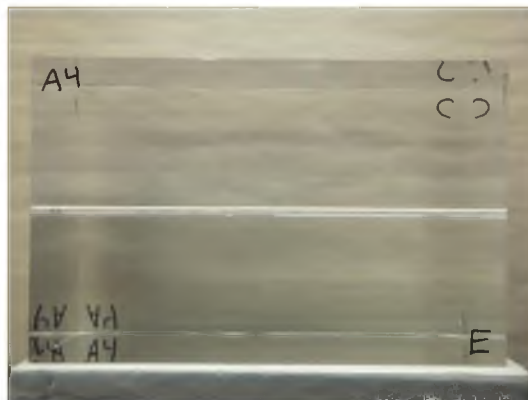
Horizontal view of specimen A4 after machined but before experimented on.
